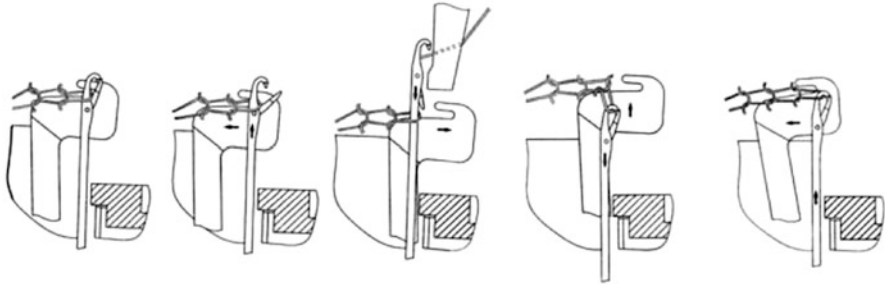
Relative movement technology on single jersey circular knitting machines [14]
